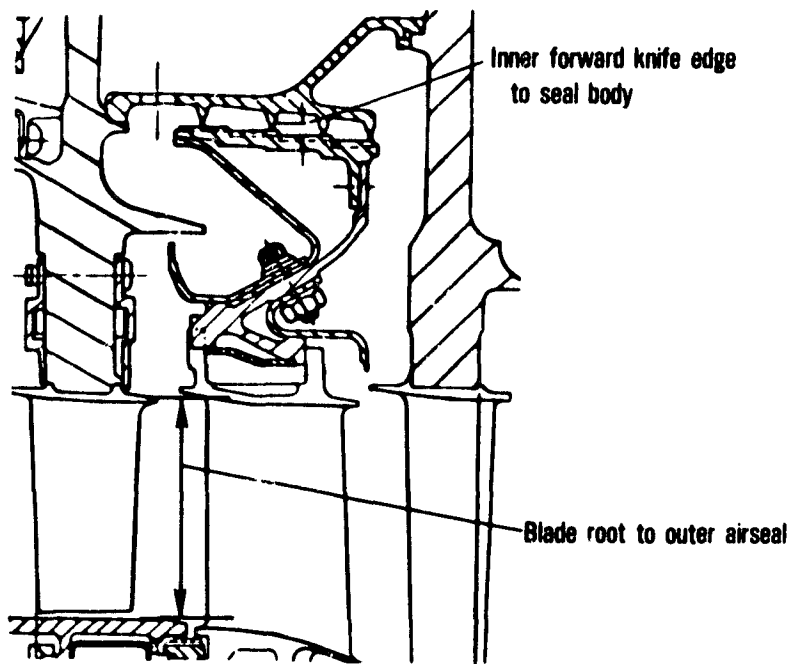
High-Pressure Turbine X-ray Locations - 2nd Stage Inner Air Seal and 1st Stage Blade Root to Outer Air Seal. (J23499-13)
